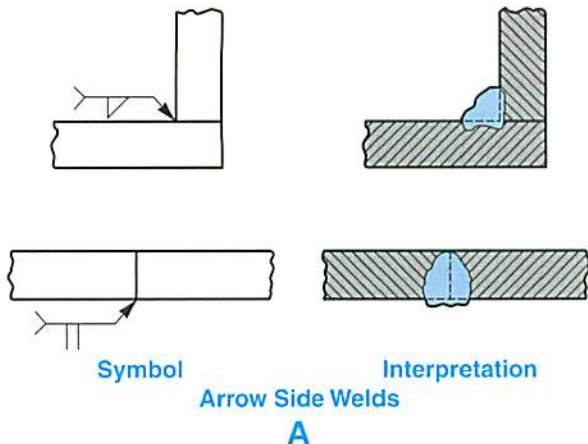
The placement of the weld symbol has a specific meaning in locating the weld.
